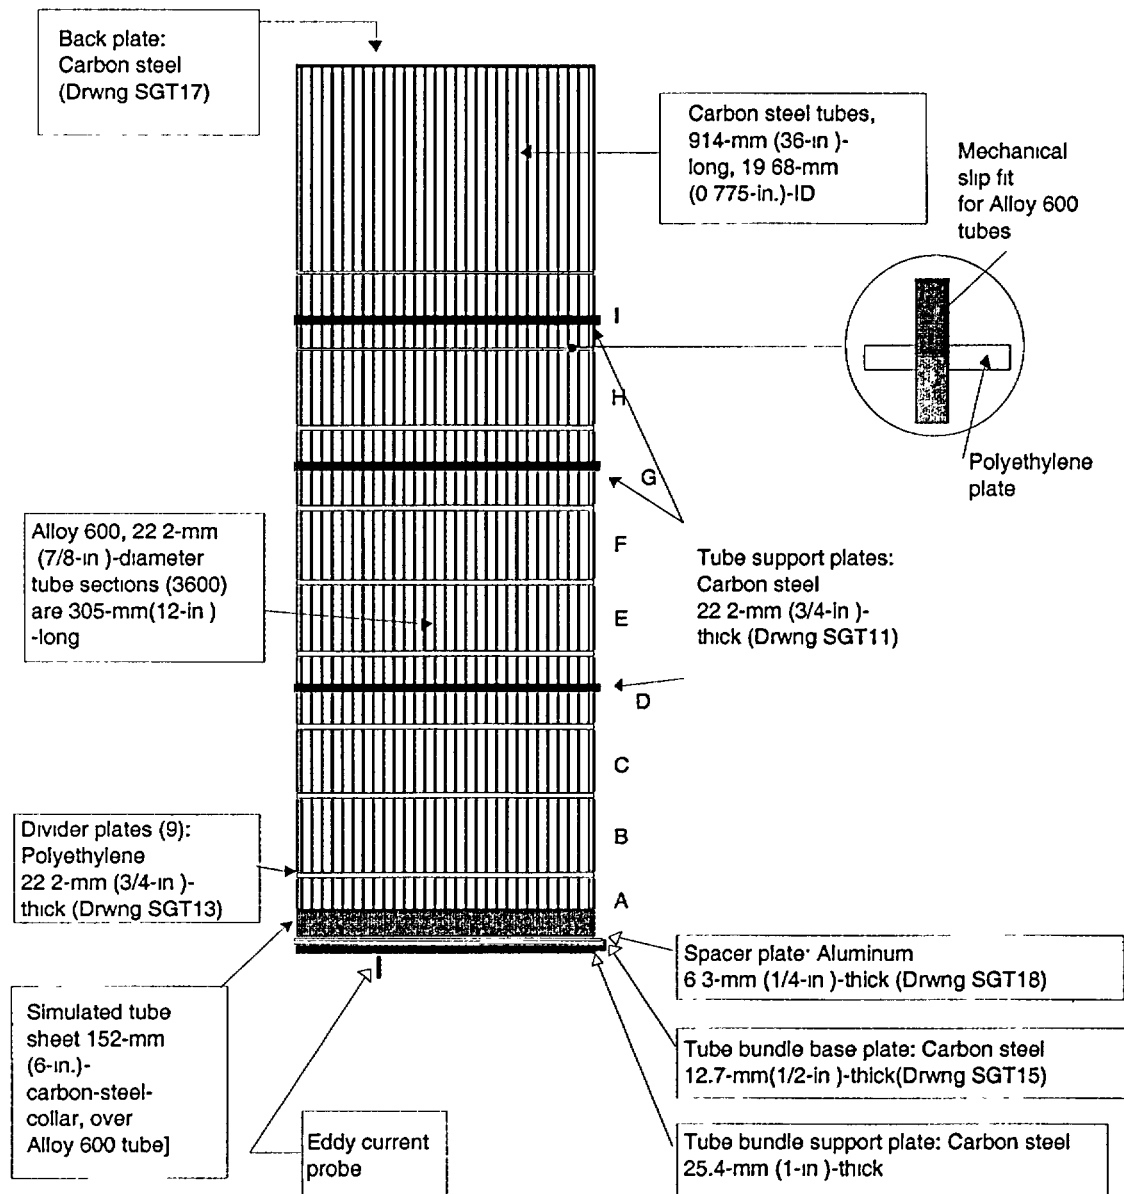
Schematic representation of steam generator mock-up tube bundle.
